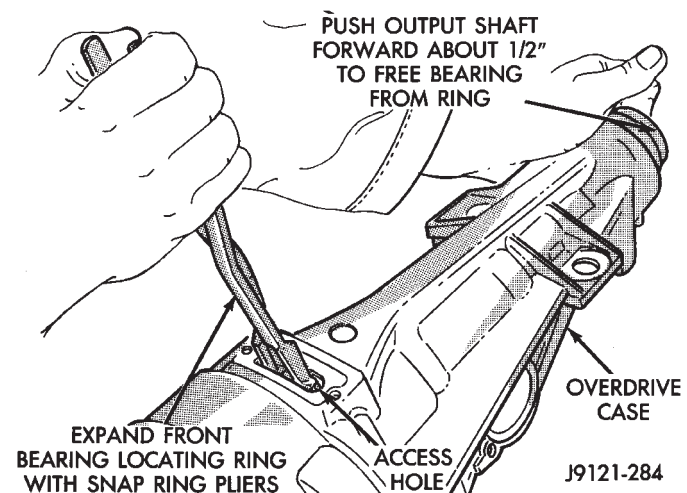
Releasing Shaft Front Bearing From Locating Ring
